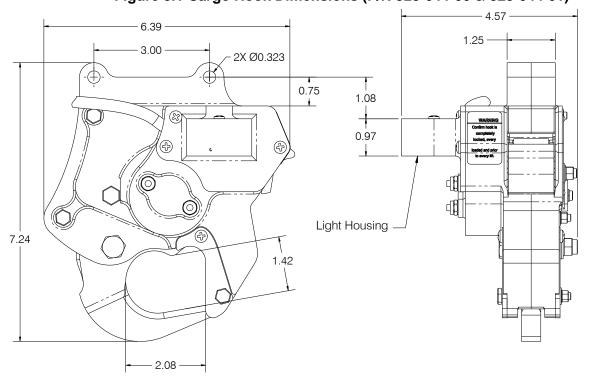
Cargo Hook Dimensions (P/N 528-044-10 & 528-044-11)
